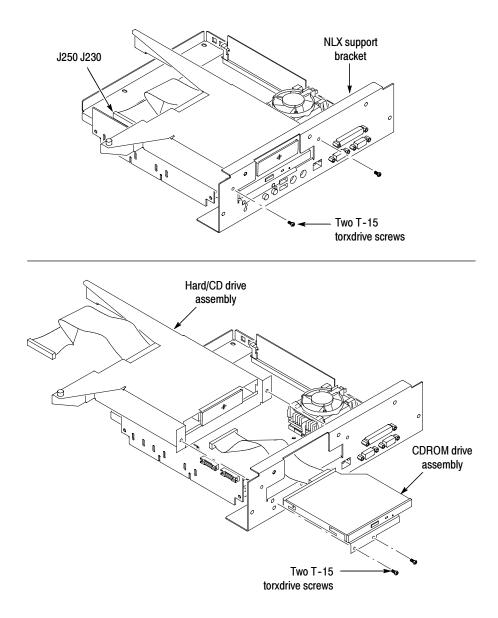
Riser Adapter & NLX board and CDROM drive assembly removal
